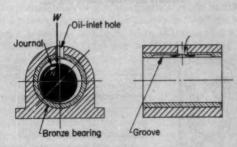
Straight-axial groove and inlet hole located at beginning of generated-pressure zone for better oil distribution.
